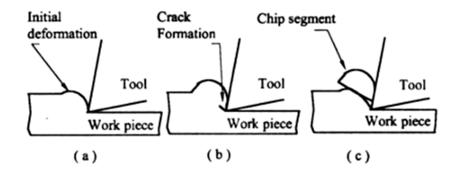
Formation Discontinuous Chips [M.C. Shaw, "Metal Cutting Principles"]
